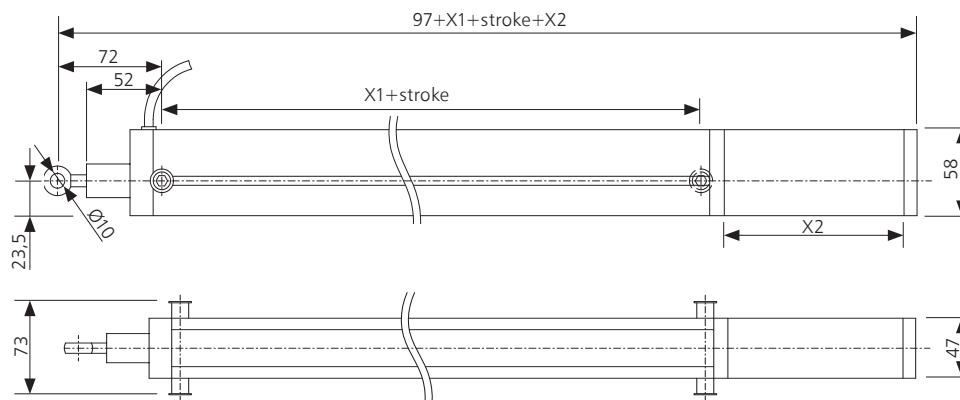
Dimensions of spindle electric actuator (standard variant)
